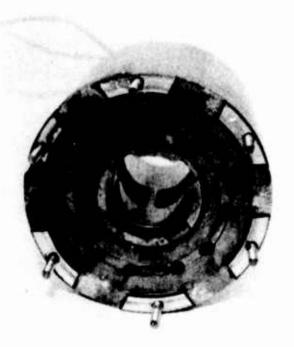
IFRT Engine No. 1, Condition of Parts after 20 Minutes Endurance Run Time. Test Dates: April 6 and 7, 1973.
